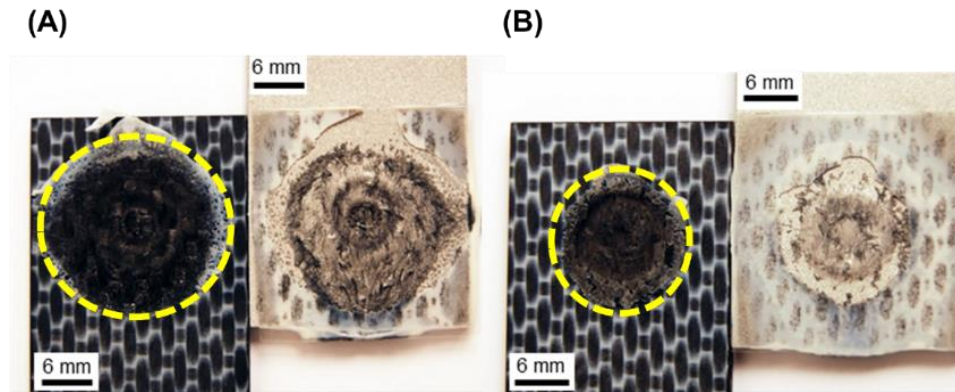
Representative examples of fracture surfaces of FSp joints produced with (A) HHI and (B) LHI joining conditions.
